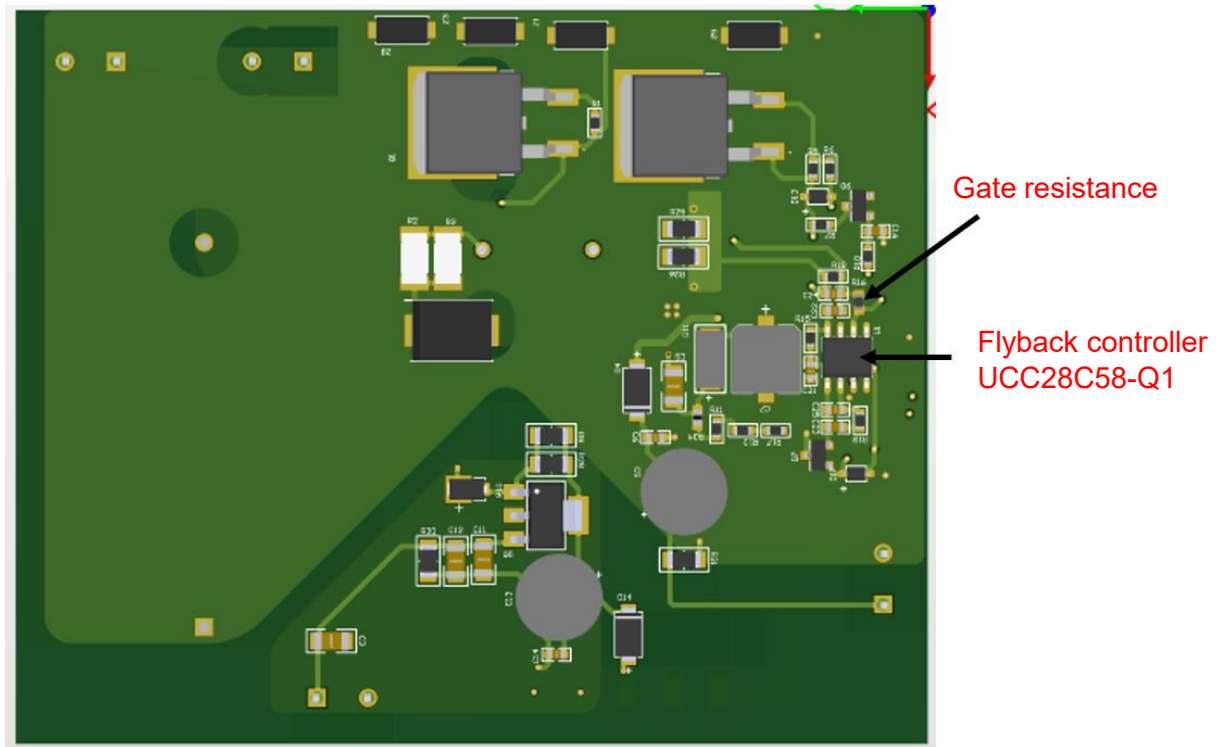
Flyback converter evaluation board: Bottom side view with major components highlighted
